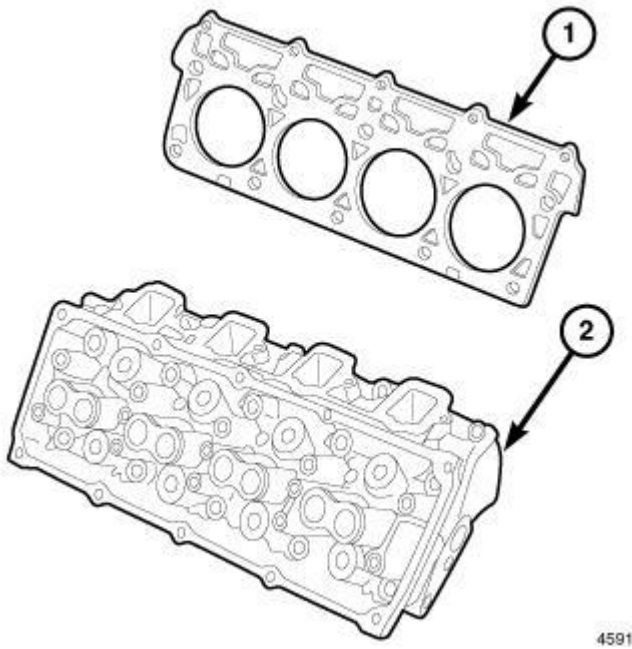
5.7L/6.1L CYLINDER HEAD COMPONENTS
